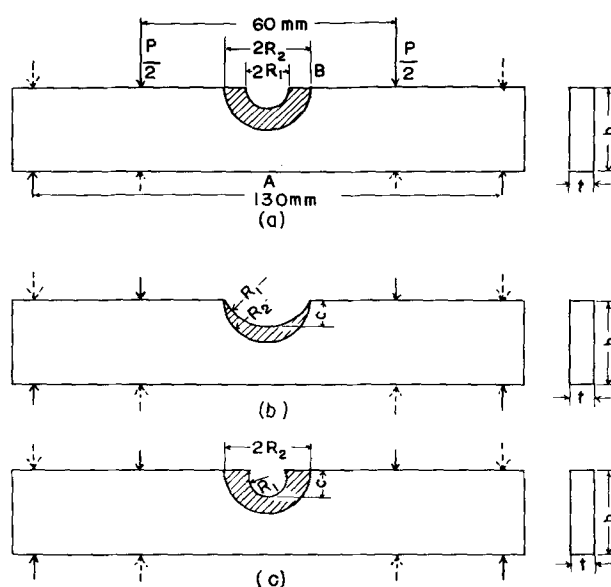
Types of test pieces for (a) concentric reinforcement, (b) crescent reinforcement and (c) arch-type reinforcement
